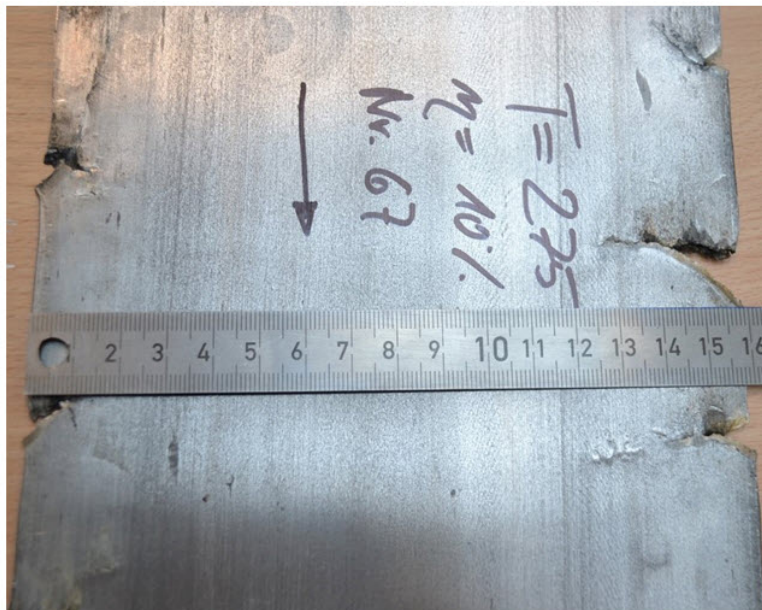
Enlarged view of the edge cracks for sheet 67; typically, damage was limited with crack lengths of about 10 to 25 mm
